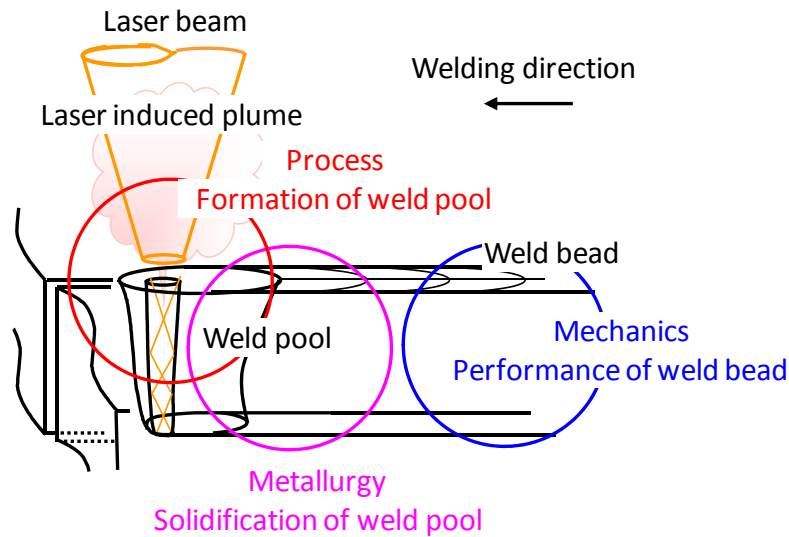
Pattern diagram of laser welding Phenomenon.
